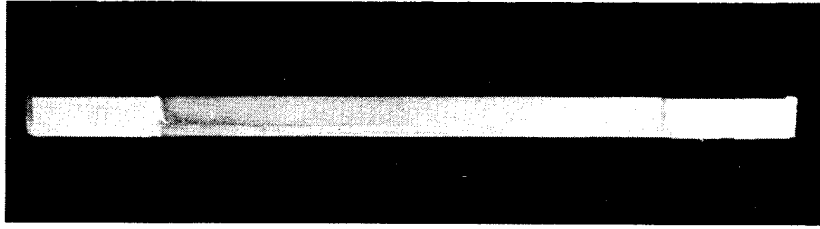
DELAMINATION CRACK IN S-GLASS/EPOXY SPECIMEN
